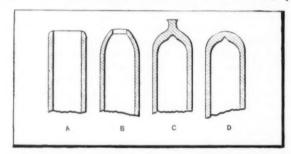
Closing Tube Ends by Spinning, Heating, and Welding
